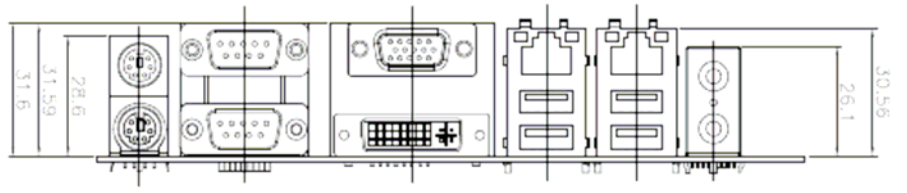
KINO-690S1 Dimensions (mm)
